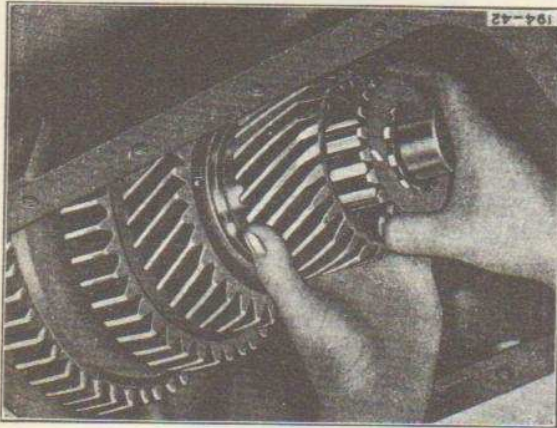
Installing Fourth Speed Gear and Thrust Washer
